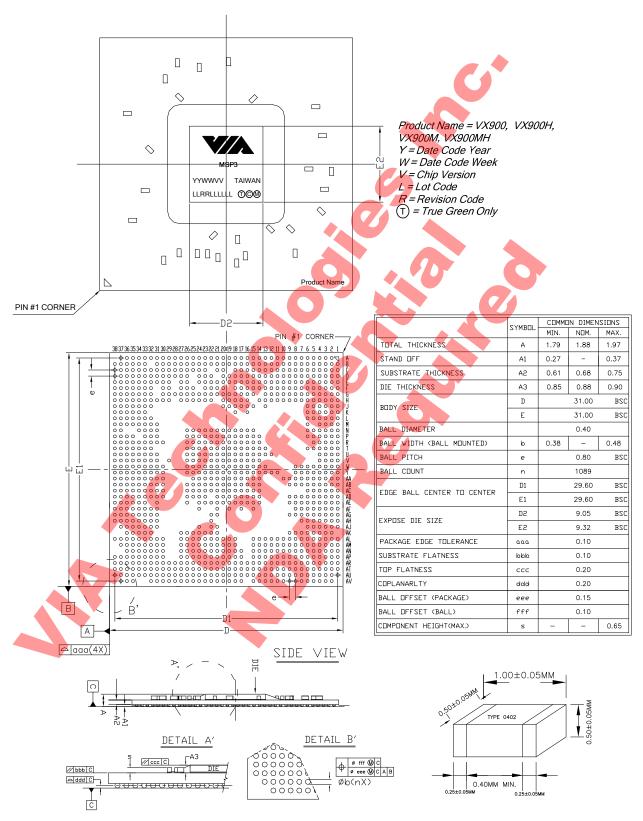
Mechanical Specifications – FCBGA-1089 Ball Grid Array Package
